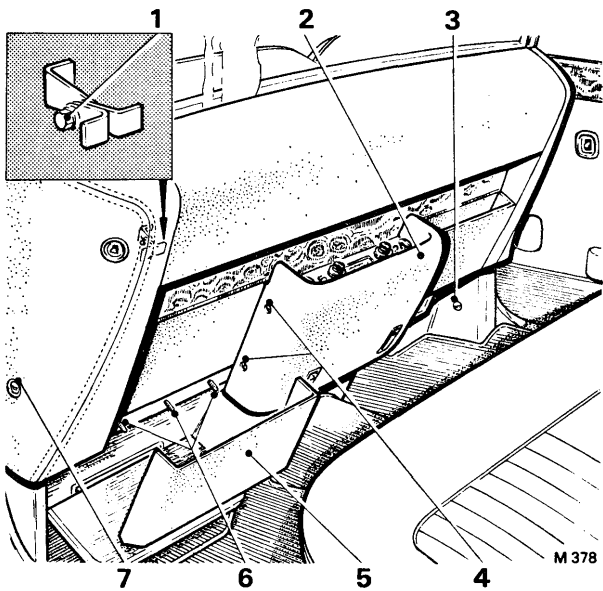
POSITION OF THE DIVISION CONSOLE MOUNTING SCREWS
